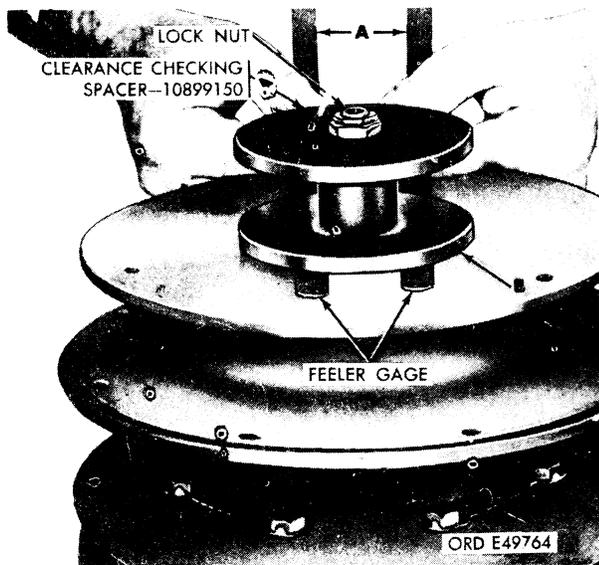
CHECKING COMPRESSOR WHEEL BACK CLEARANCE.
